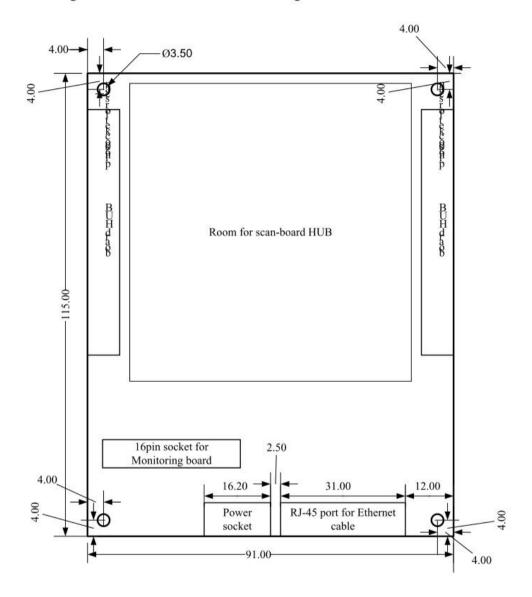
detail geometric structure of NS300-H (unit mm)
